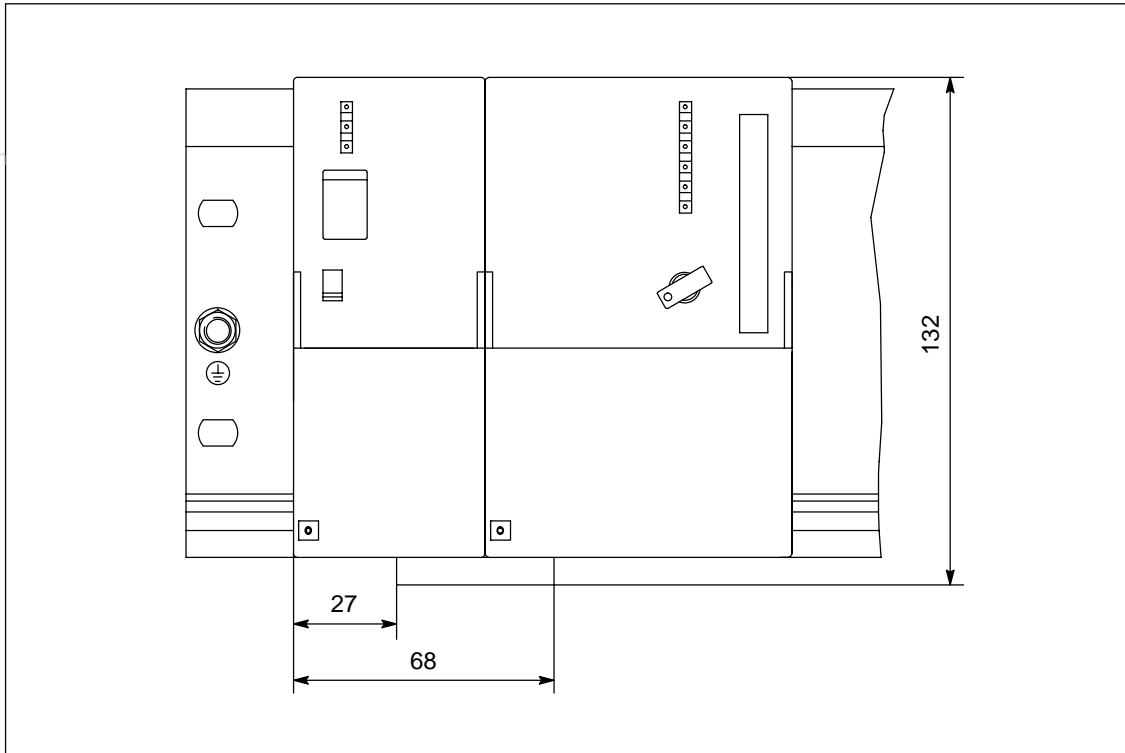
Dimension Drawing of the Power Supply Module PS 307; 5 A with CPUs 313/314/315/315-2 DP. Front View
